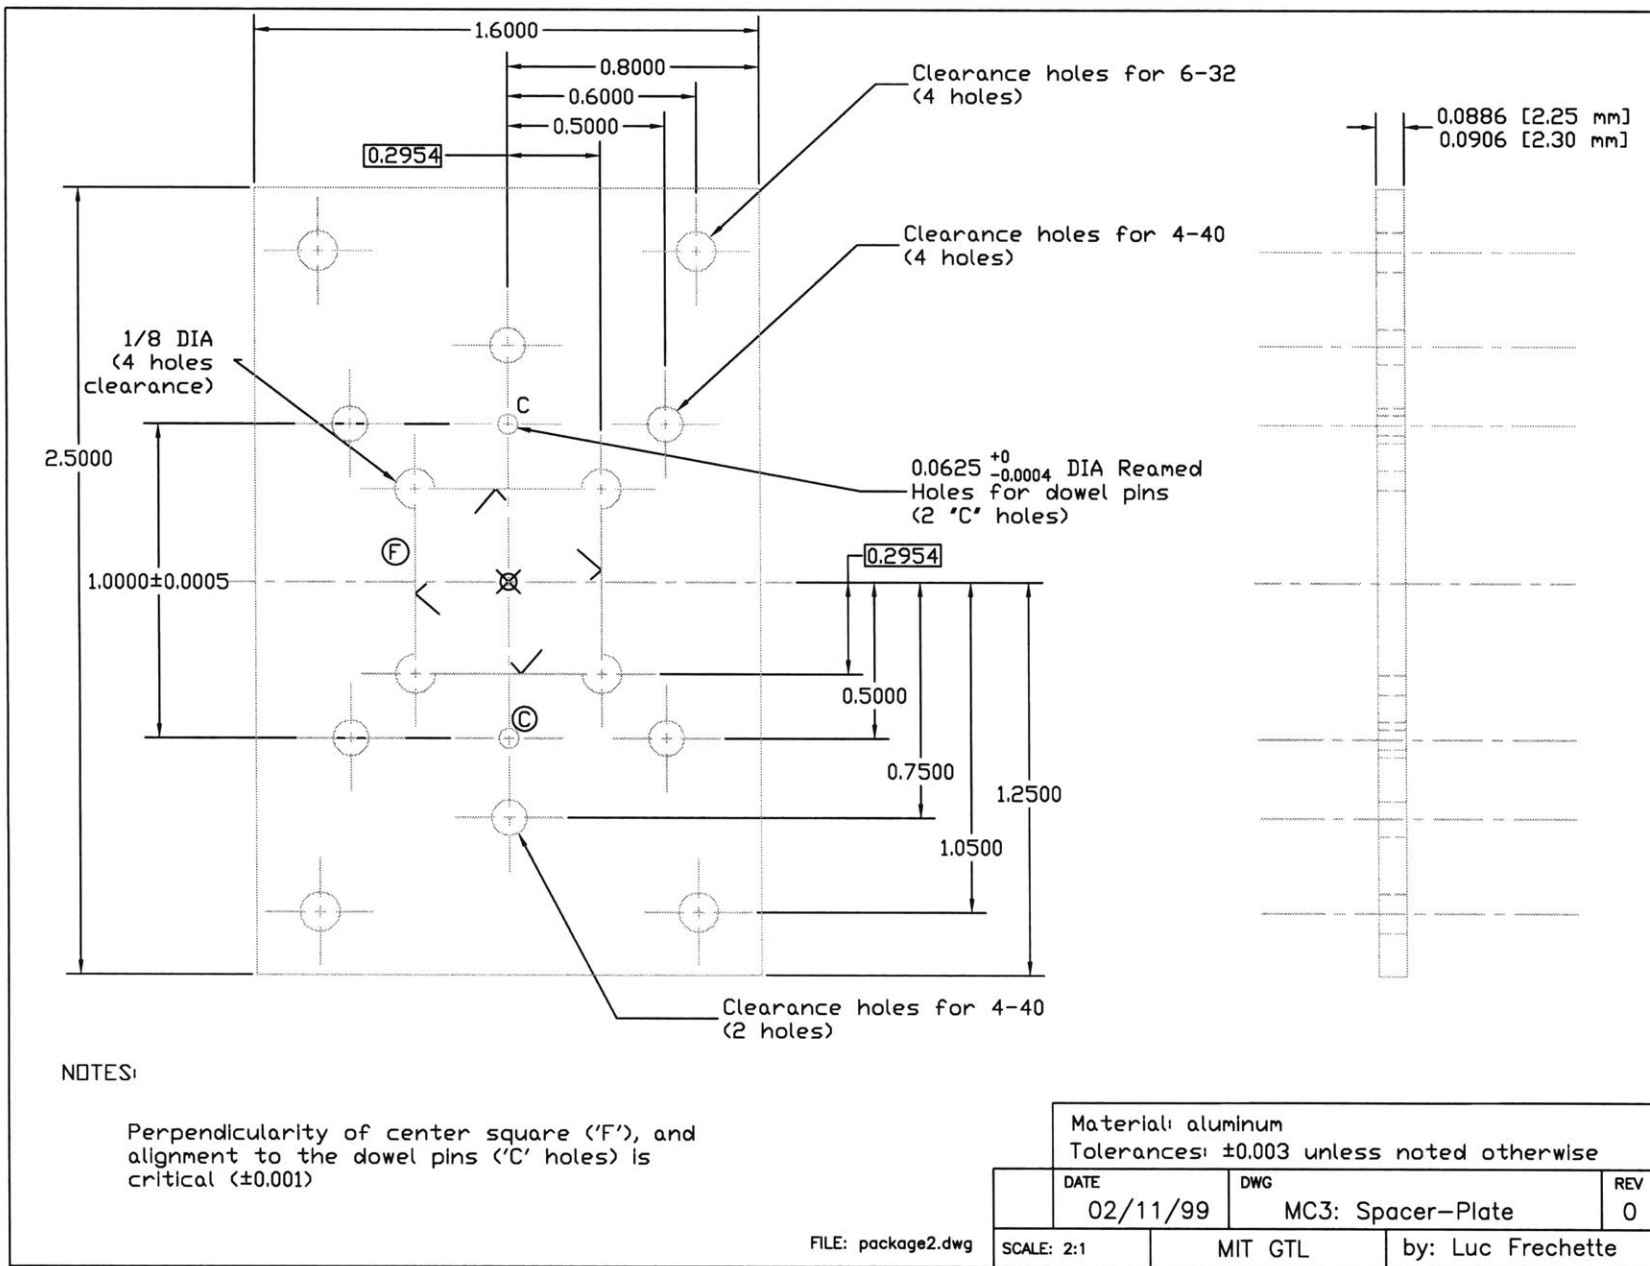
Technical drawings of the MC-Bearing rig and Motor-Compressor package - Spacer plate
